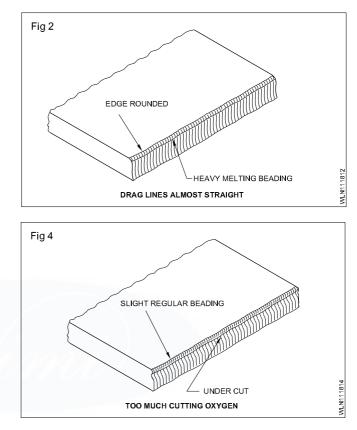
Extremely slow cutting speed. Pressure marks on the cut face indicate too much oxygen for the cutting conditions. Either the tip is too big, the cutting oxygen pressure is too high, or the speed is too slow as shown by the rounded or beaded top edge. On reducing the cutting oxygen volume to the correct proportions for the thickness of the cut, the pressure marks will recede toward the bottom edge until they finally disappear.
